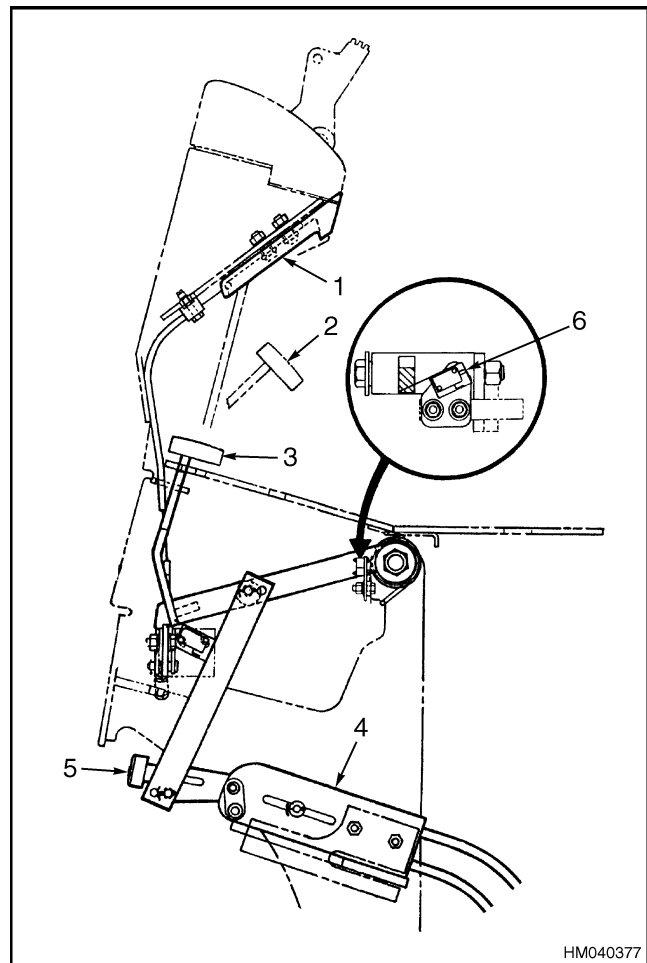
Parking Brake Assembly for ERCIP16-20AAF (ERC030-040AH) (B814/C814) Lift Trucks
